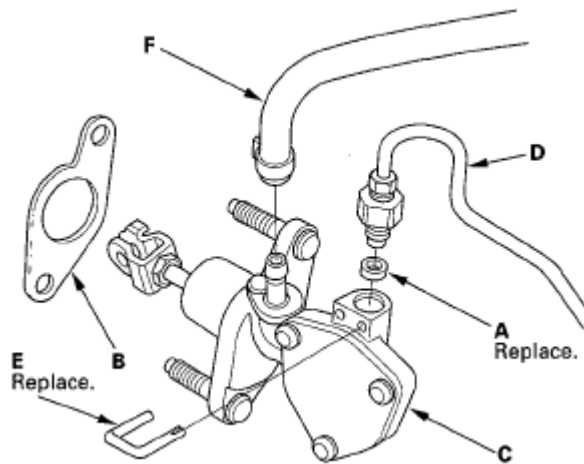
Identifying O-Ring, Clutch Master Cylinder Seal And Clutch Master Cylinder
